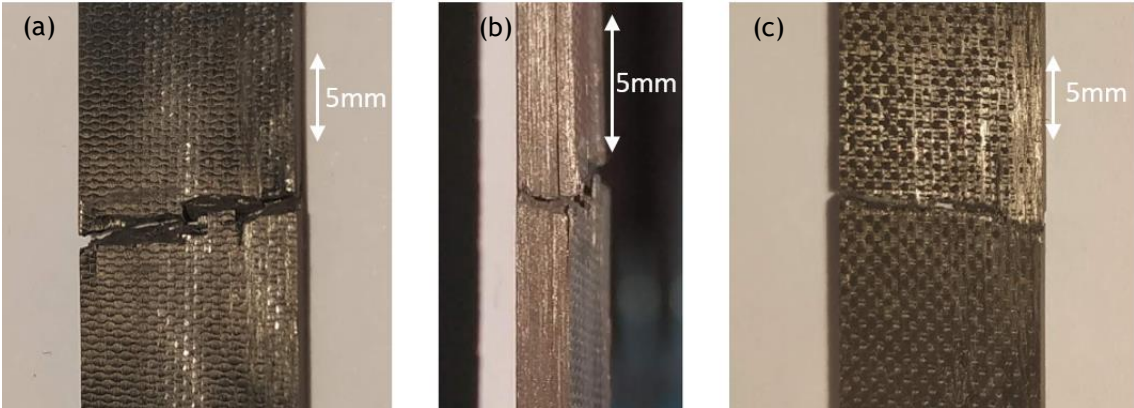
CFRP long samples failure mode, (a)-compression side view, (b)- side view, (c)- tensile side view
